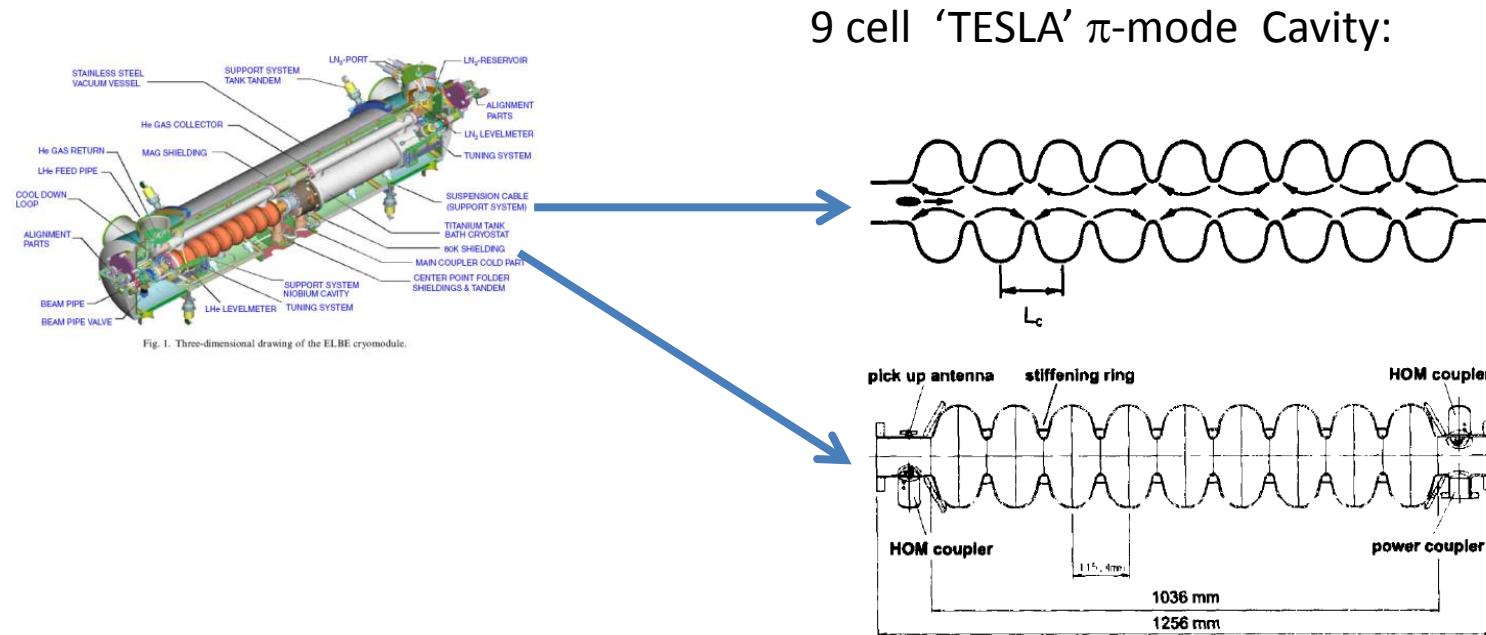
Three-dimensional drawing of the ELBE cryomodule.
